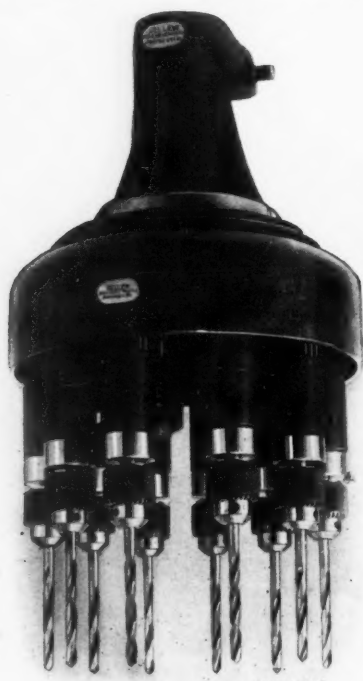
Sellew Multiple Adjustable Spindle Drill Head
